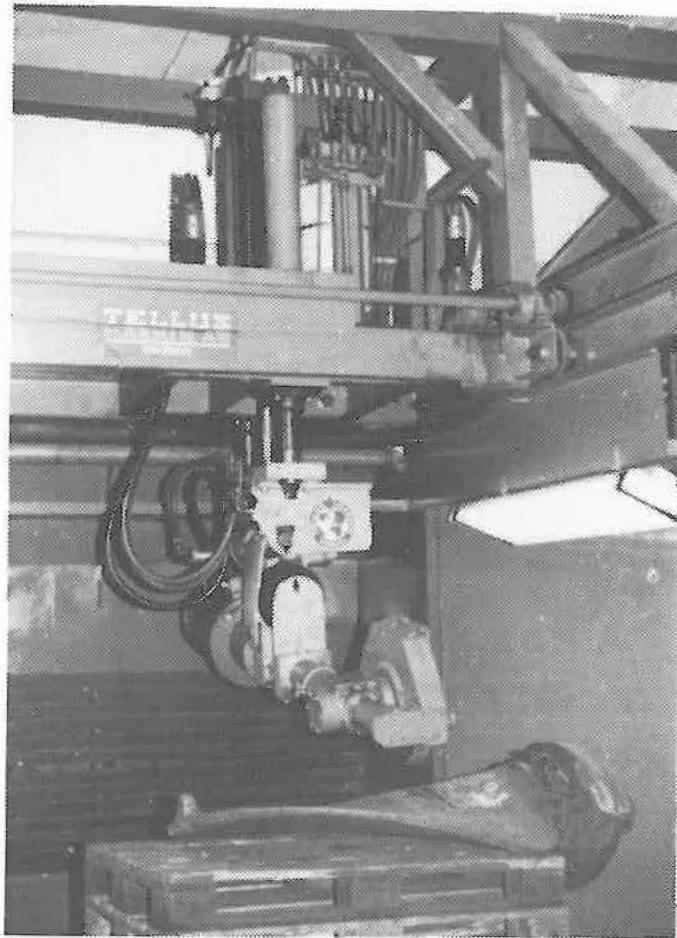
Pneumatically controlled manipulator for grinding of castings.
